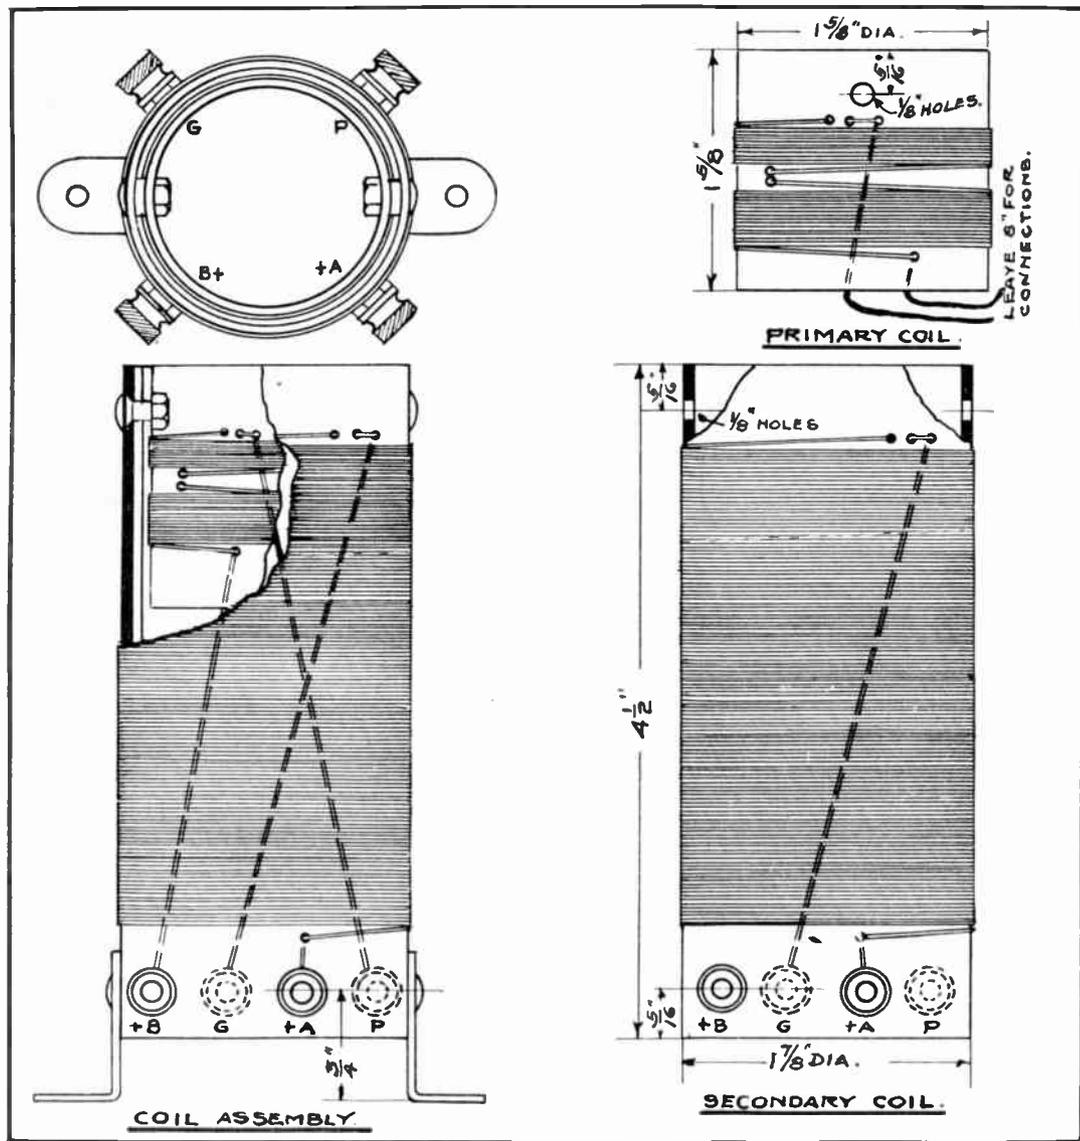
Detailed Drawing Showing How to Construct Coil No. 2 for Duston Special
